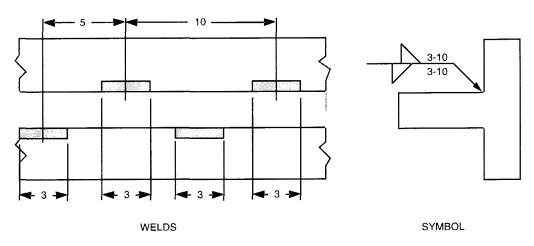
Specification of Size and Length of Fillet Welds
